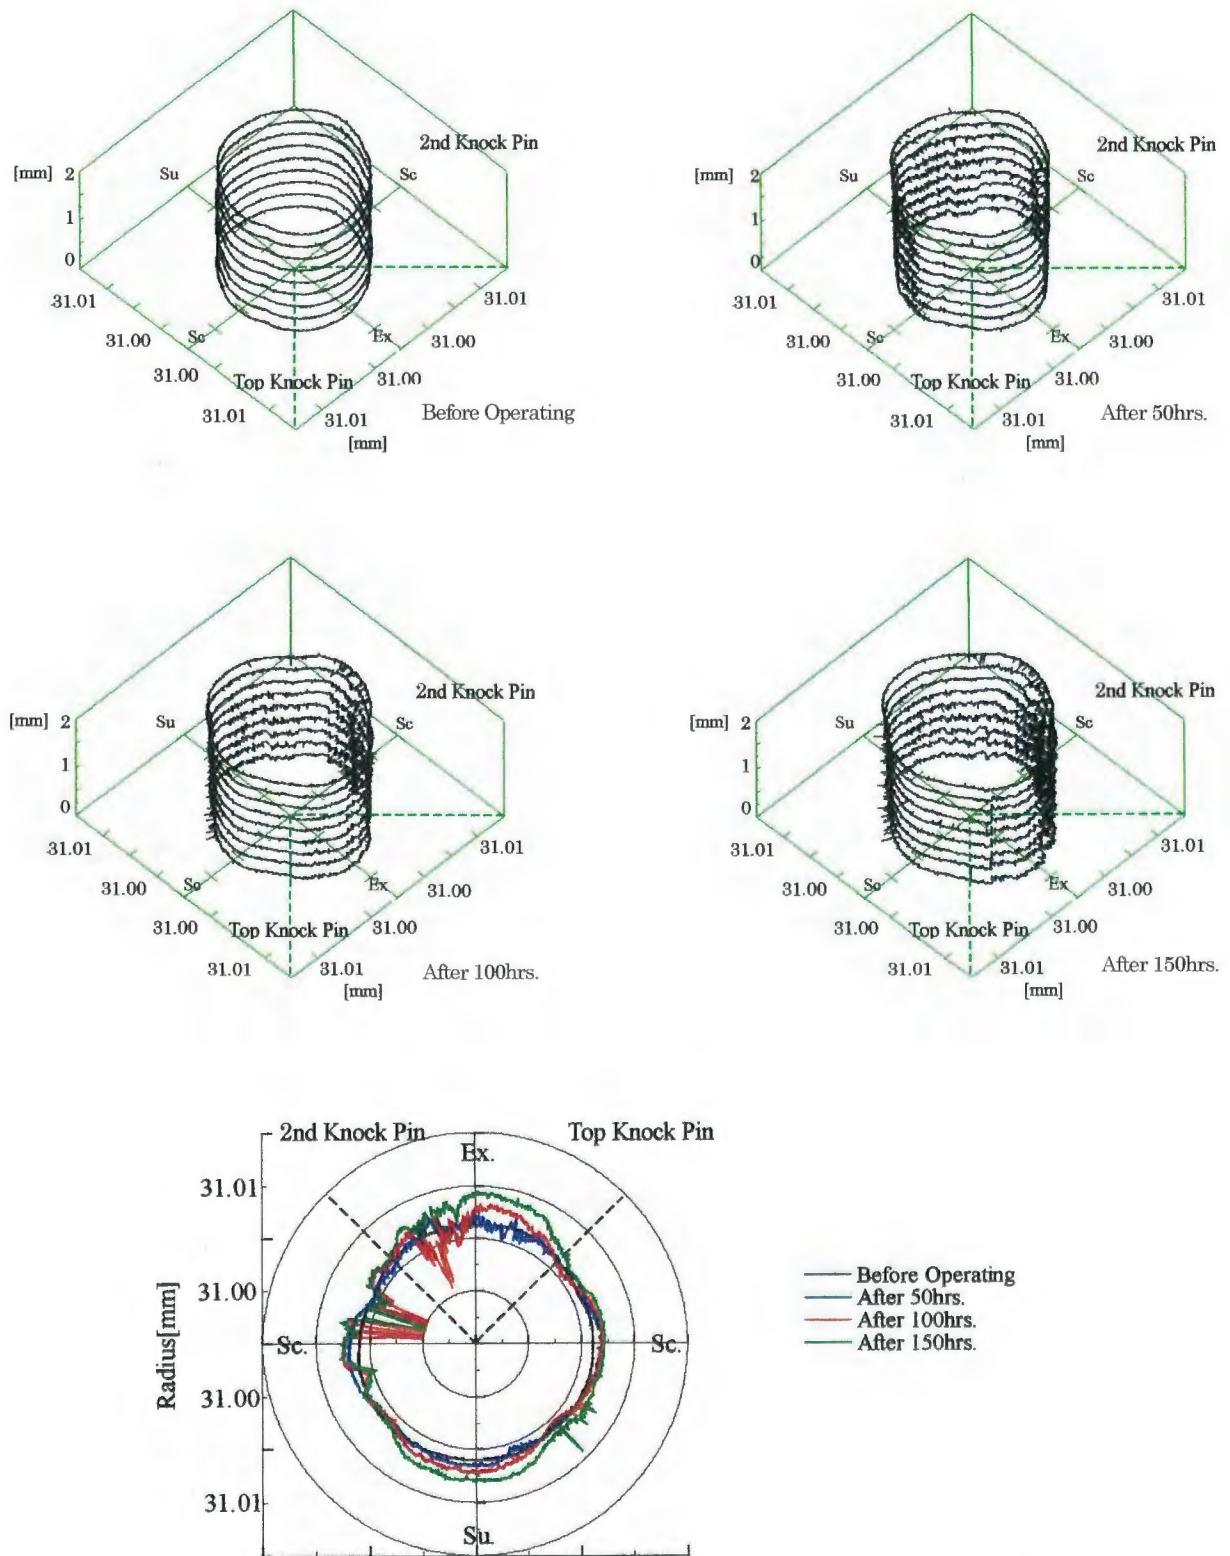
(a) The three dimensional and plane form of cylinder M1(RND1)
